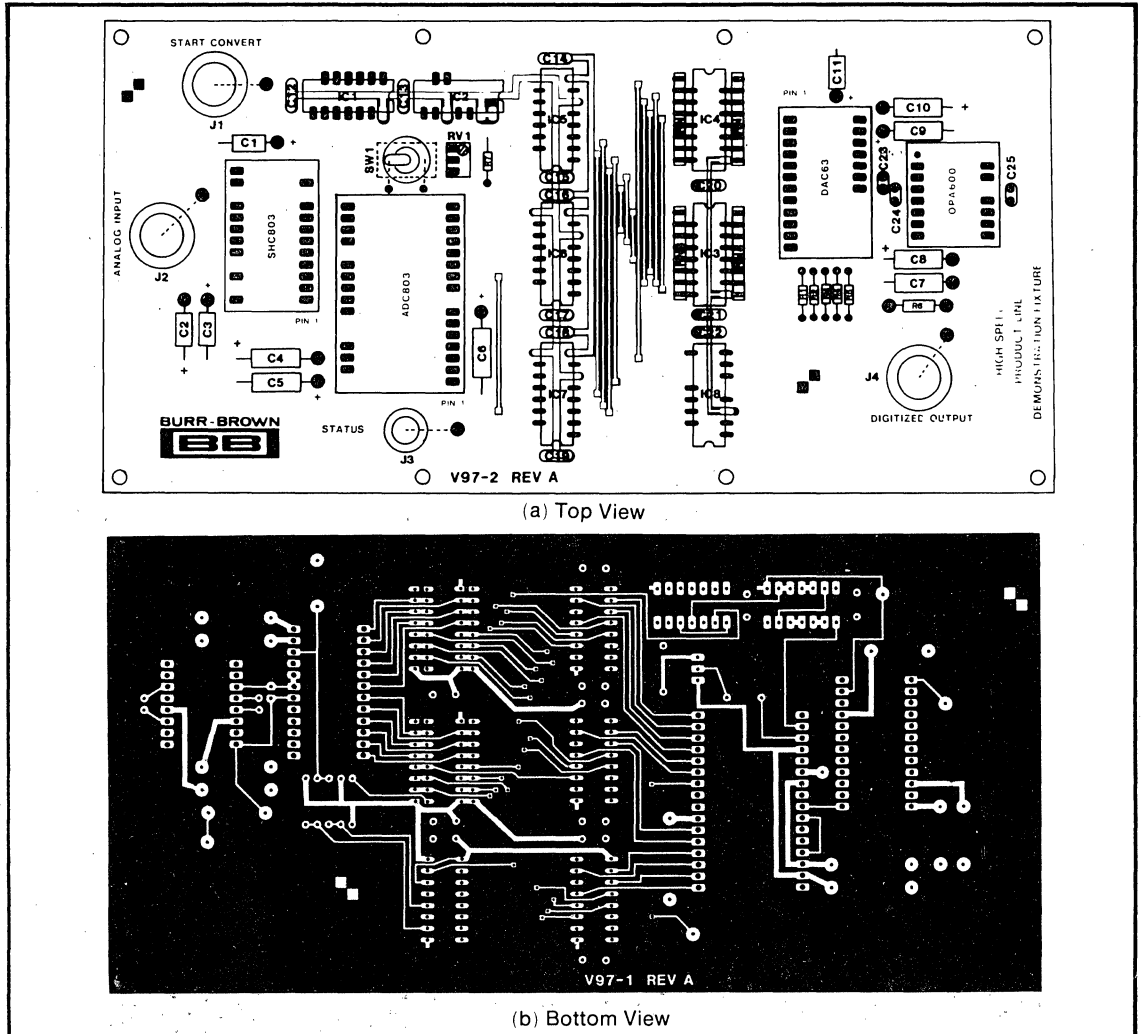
PC Board Layout for Beat Frequency Test Fixture.
